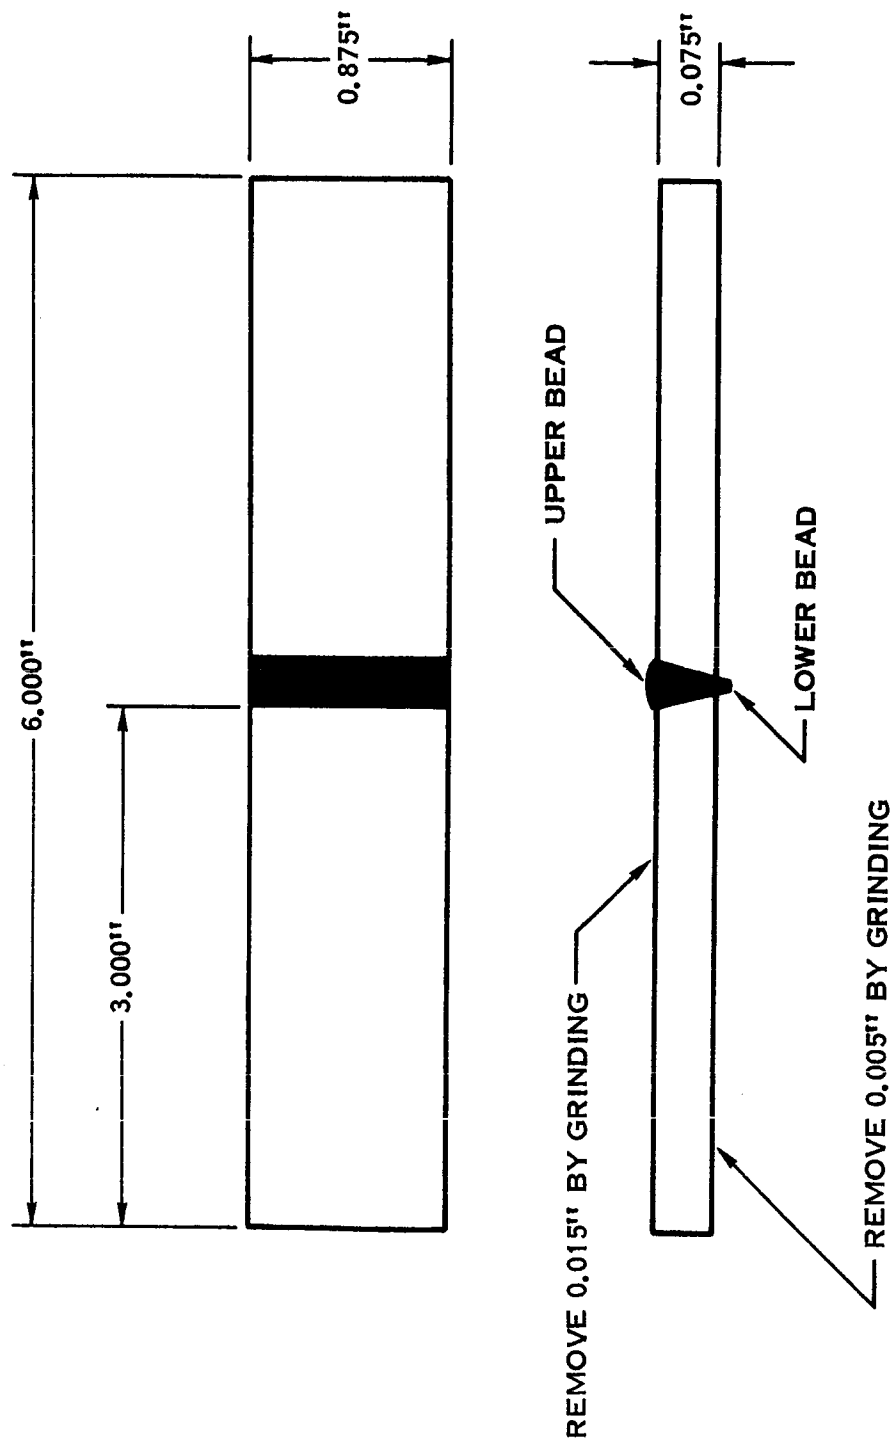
BEND TEST SPECIMEN (AISI 304)
